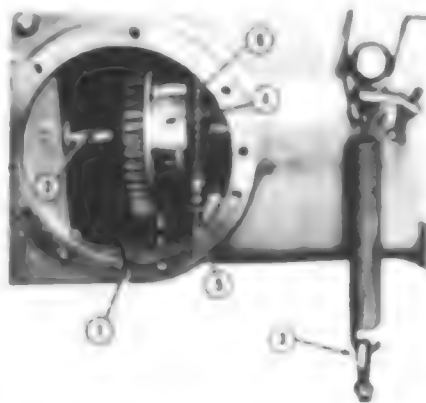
View of pto clutch, pump drive gear, lower pto drive shaft and lube pump gear on Models 684, 784 and 884. Lube pump is not used on Model Hydro 84.
